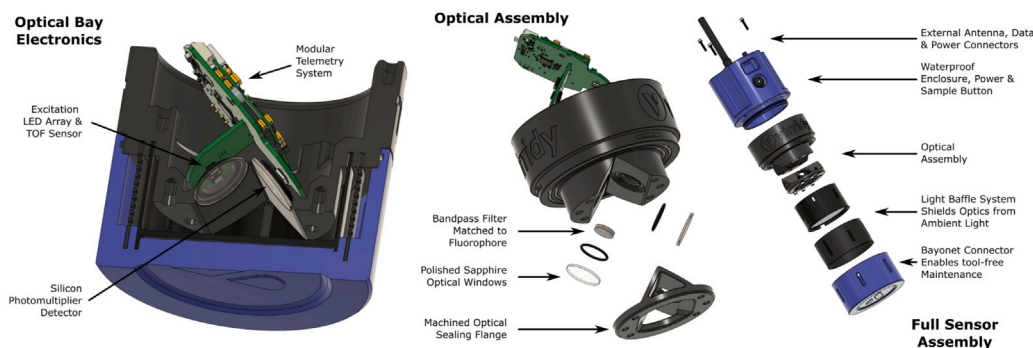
Fluorimeter mechanical, electrical and optical assembly.
